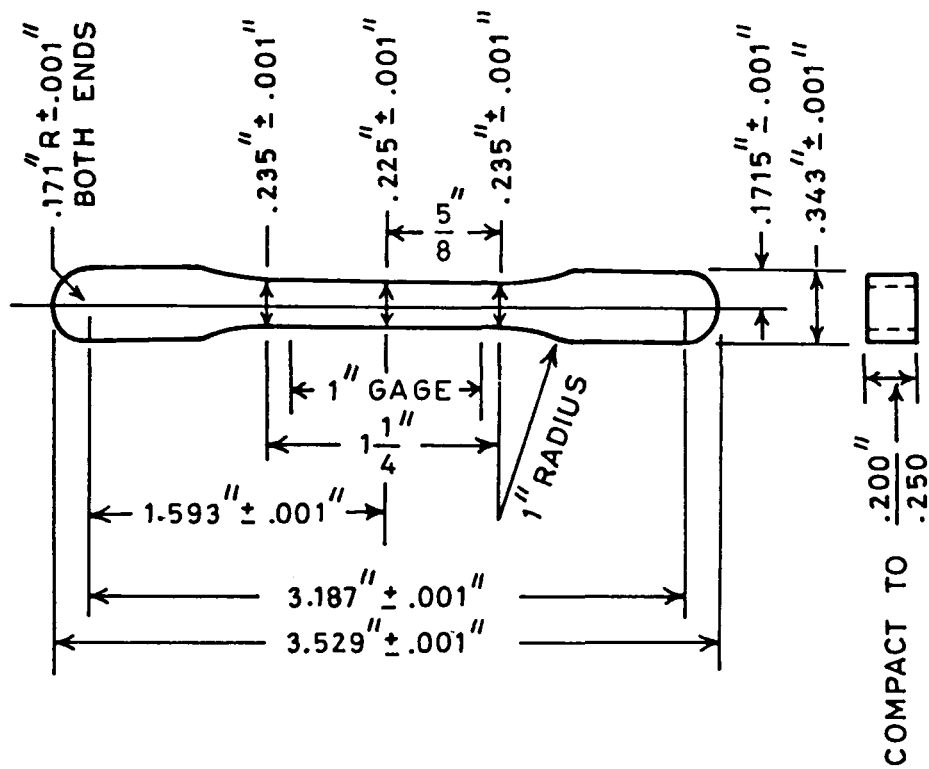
MPIF tensile test piece; green dimension, when in the die.
